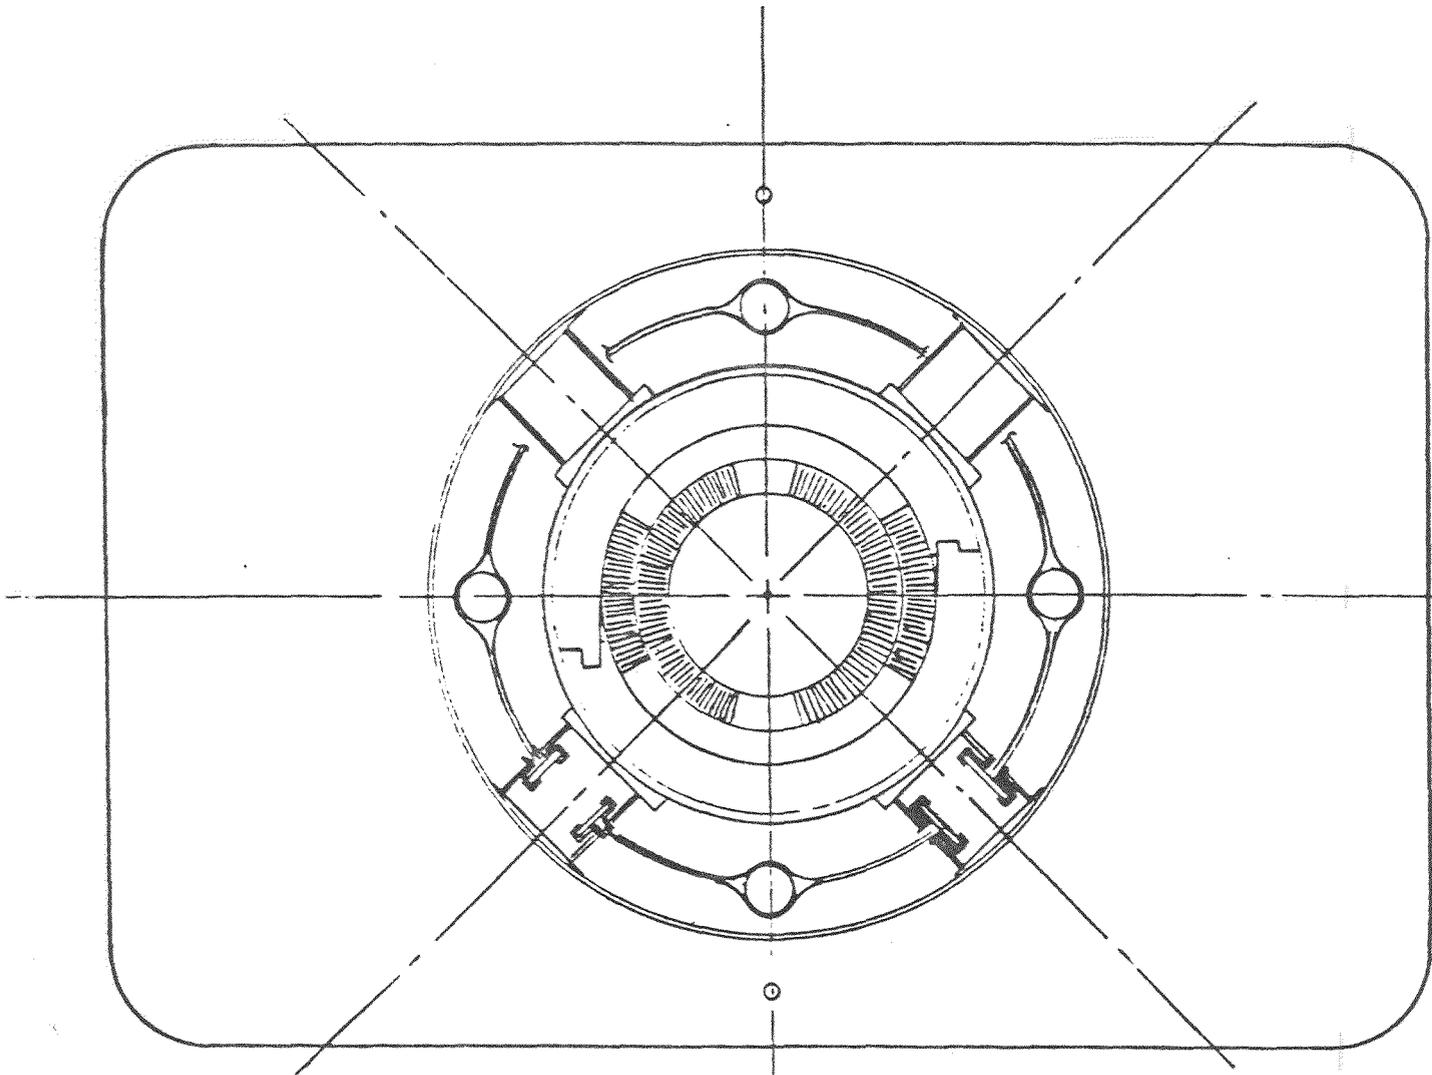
D and 7517-D show two versions of the connection made between two magnets. Drawing 7517-D shows a simple end connection which assumes that the beam tubes will be welded vacuum tight and then surrounded by single phase liquid helium. The drawing shows that the magnet cryostats have two flexible ends which are coupled by a flat plate with holes. Electrical conductors protrude through these holes, and the splice is made during assembly of the magnet end box joint.
